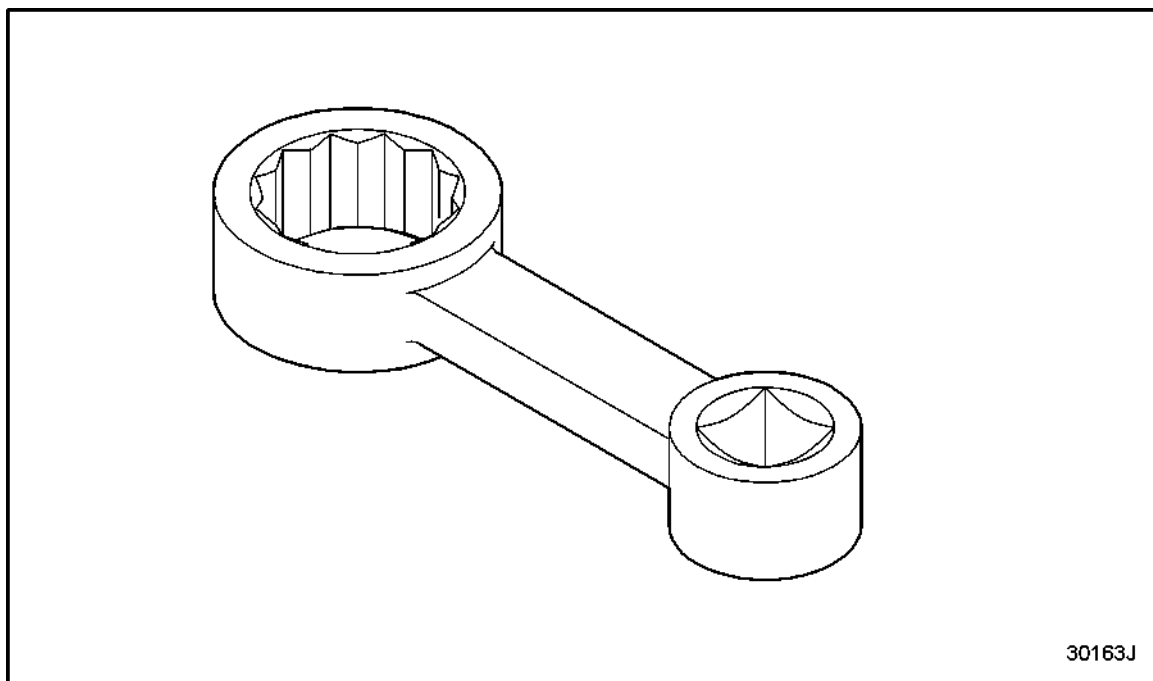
Crankshaft Torque Wrench Adapter, J 22898-A
